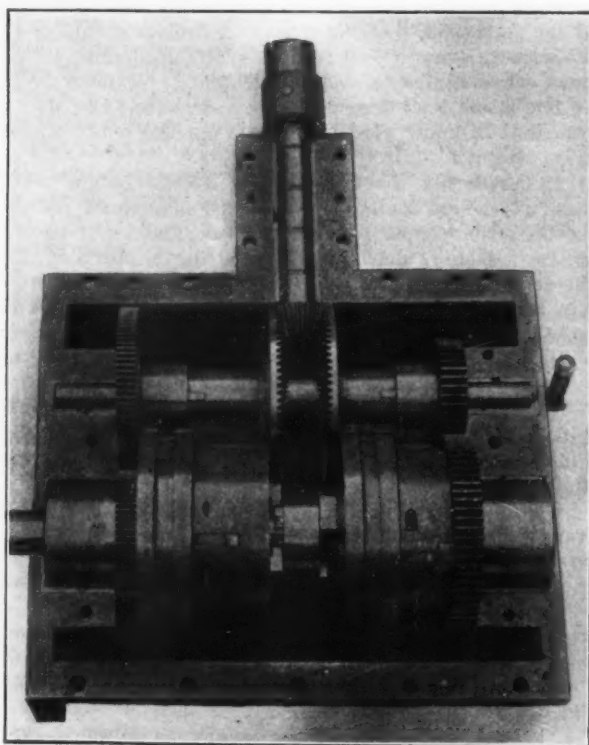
Another View of the Mechanism of the Conkling Reversing Drive.
